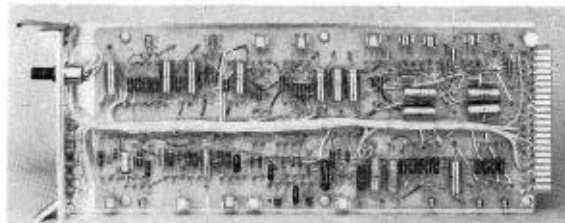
Side view of one of the standardized plug-in units. Printed circuit board is mounted on metal plate to provide rigidity and protection, and to insure proper seating of contacts in receptacles. Front is formed of section of specially shaped aluminum extrusion.
